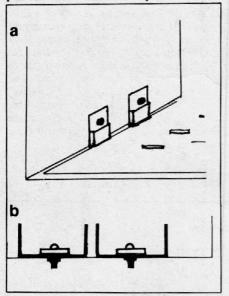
In (a) the regulators are mounted to the chassis with insulating kits; (b) shows the top view when using two small heatsinks.
